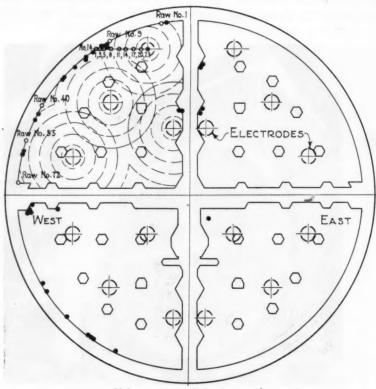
TUBE SHEET NO. 9 CONDENSER
